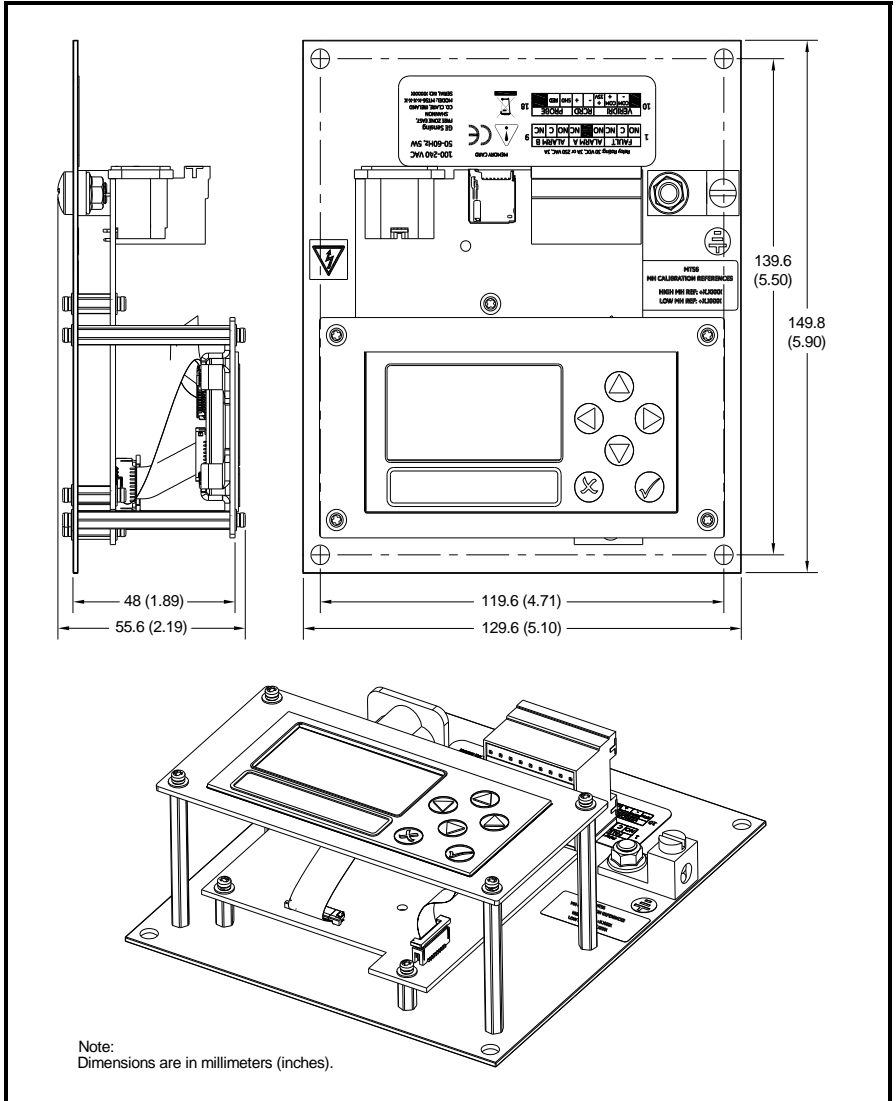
Non-Enclosure Package Outline (ref. dwg #712-1687)
